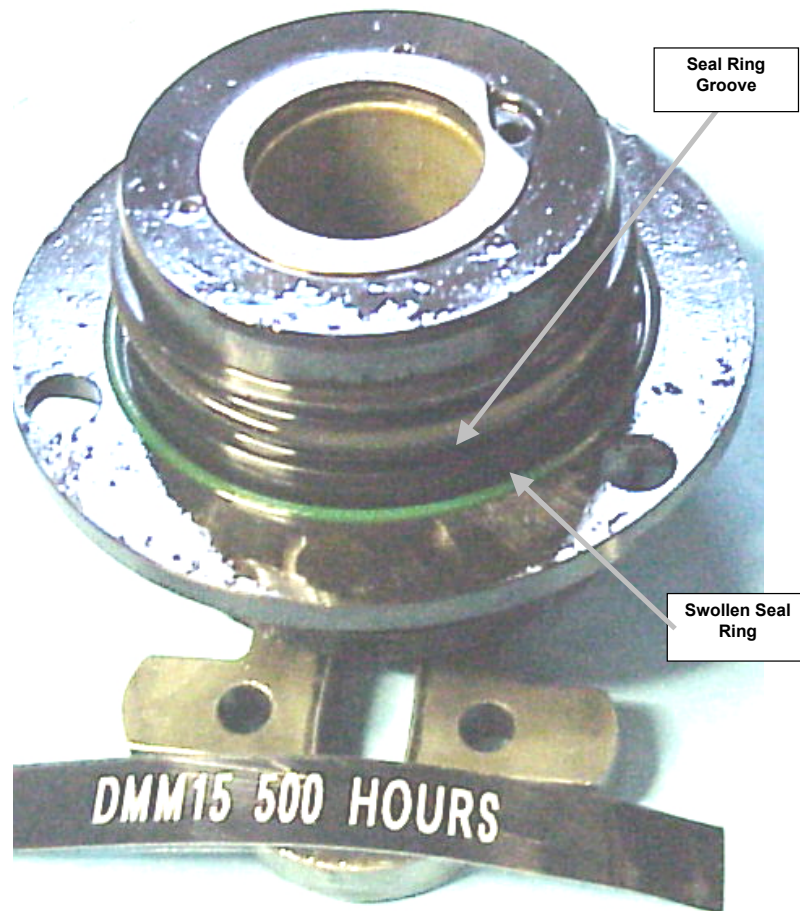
DMM15 (Test 6) Pump Bearing Housing with Swollen Seal Ring
